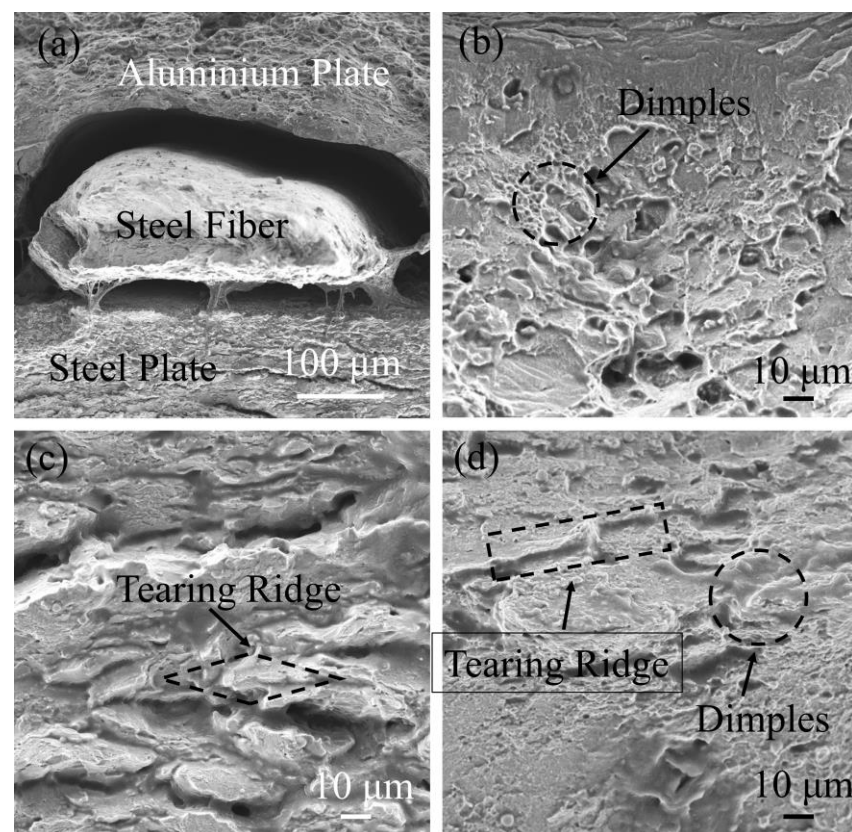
Fracture SEM of fiber-reinforced composite plate: (a) fracture SEM; (b) 2A12 aluminum fracture SEM; (c) SS-304 stainless steel fracture SEM; (d) fiber fracture SEM.
